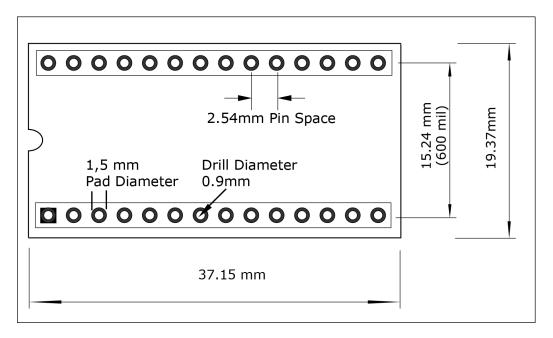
Recommended PCB layout for SM125-M2 module
